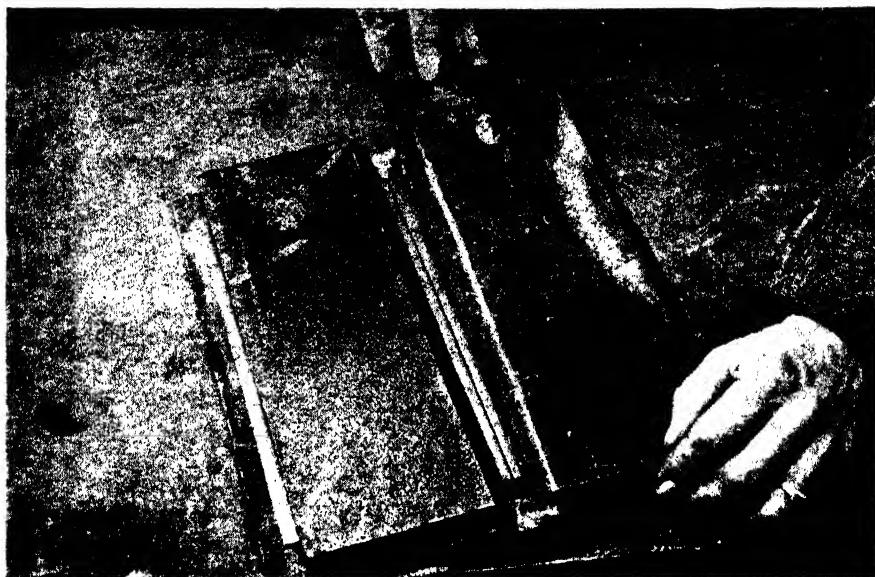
JIG FOR SHEET METAL BUTT WELD PARTLY ASSEMBLED
